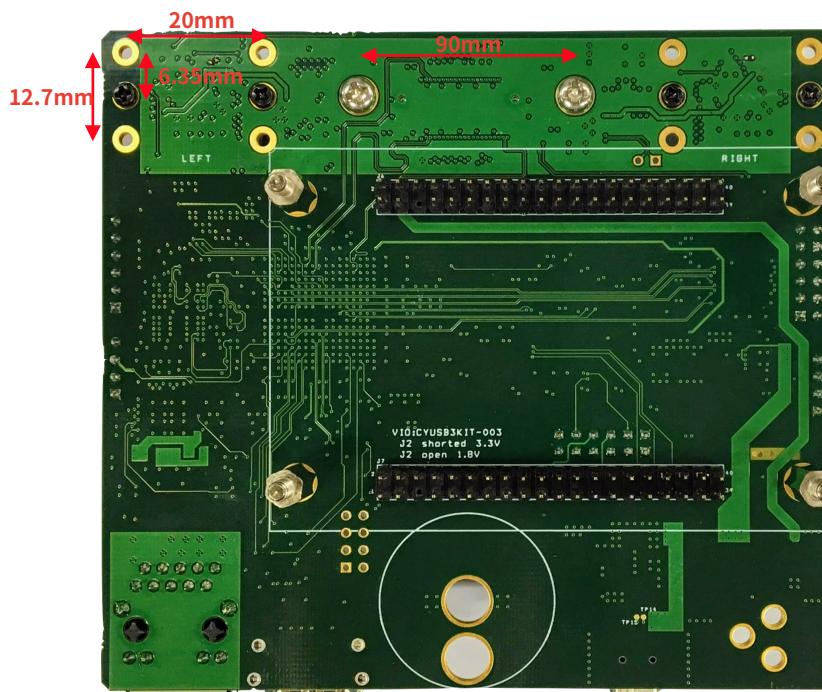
M-CIS-S6-FX3CON bottom side dimension
